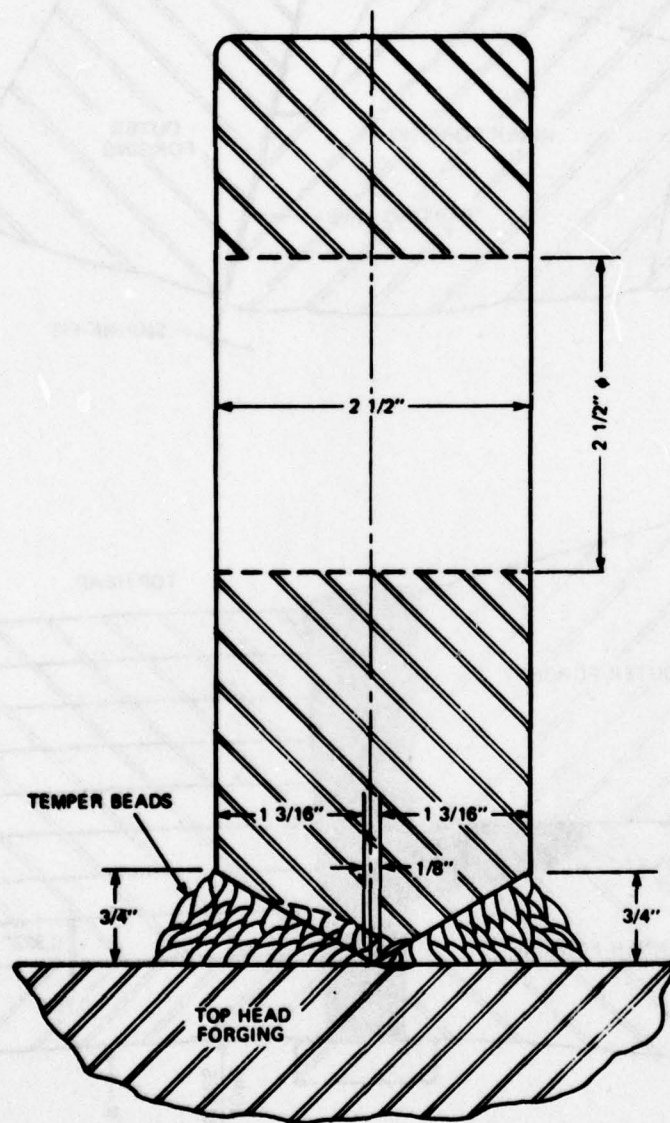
Welding Details for Head Lifting Lugs
